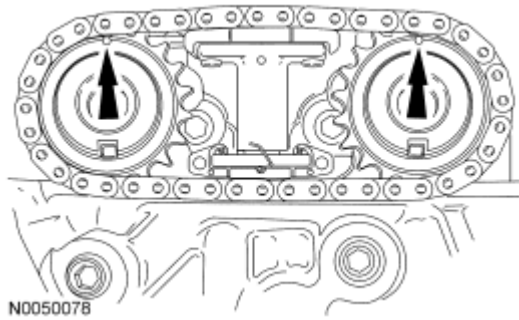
Identifying Timing Marks At 12 O'clock Position
